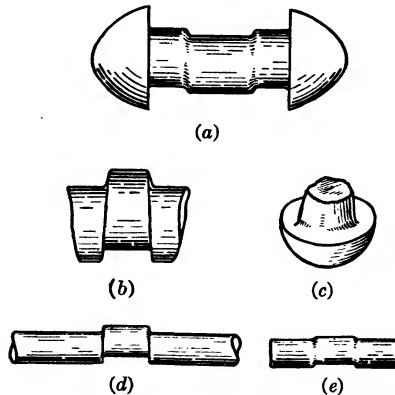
Shearing of (a) rivet in double shear; (b) headless rivet showing double shear; (c) failure of rivet in shear; (d) lead cylinder; (e) wooden pin.
